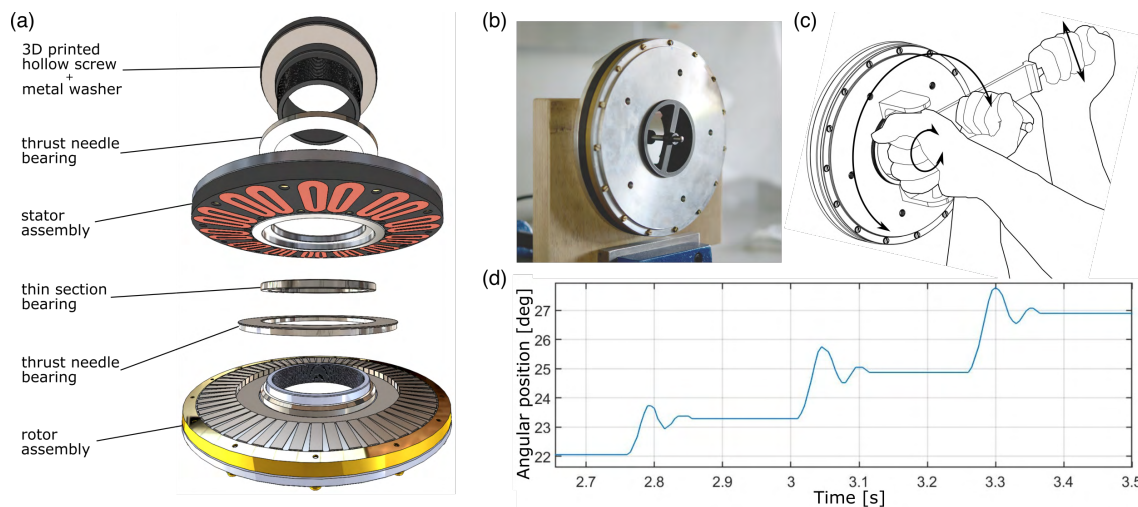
We have invented a new high-performance motor for haptic applications. (a) Exploded view of the motor design. (b) Photograph of the fabricated motor. (c) Illustration of how such a motor could be used for three possible force-feedback devices. (d) Three step responses (1.2° , 1.6° , and 2°) of the motor in closed-loop position control.
